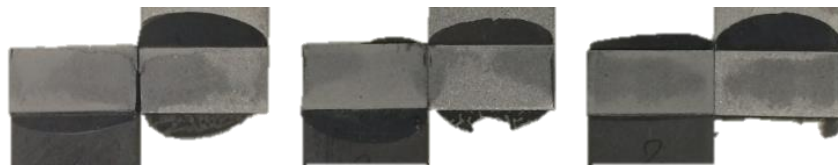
Failure modes of CFRP (1.2 mm)/HSS (1 mm) 12.5 mm overlap SLJs tested specimens
